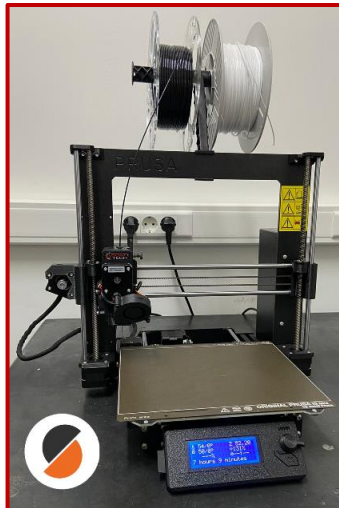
Photography of the 3D Printer used to print all the components. (Prusa i3 MK3S®)
